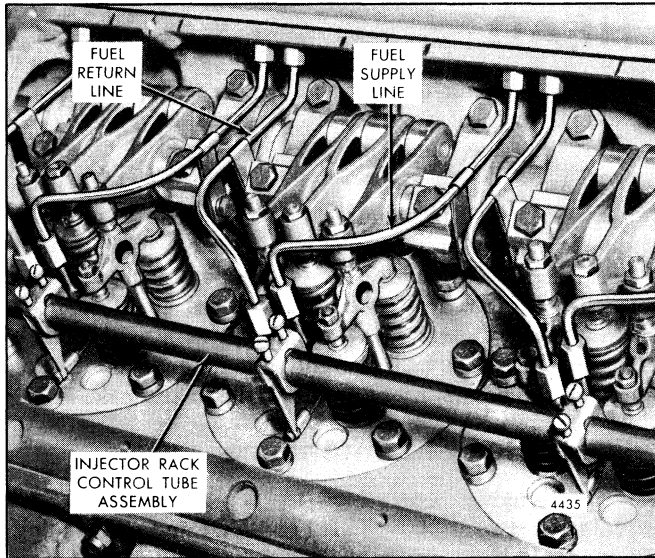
Location of the Injector Rack Control Tube Assembly
